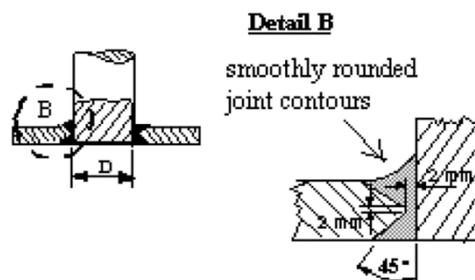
Welded joint between rudder stock and coupling flange for small stock diameter
